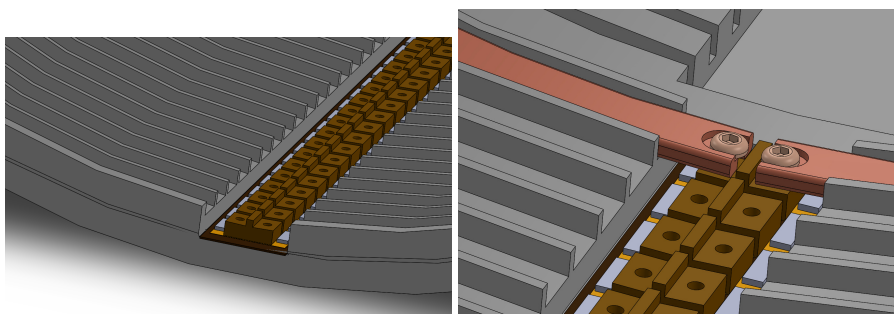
Resistor chain already mounted in the polyethylene (left). Detail of the assembly of one ring to the resistor chain in the drift region (right).
